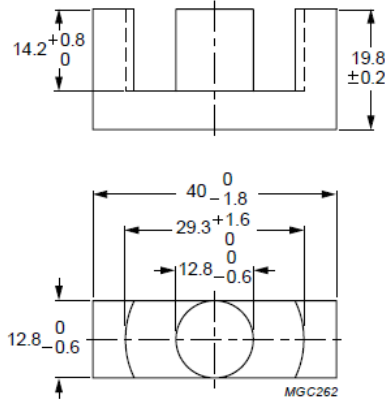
The dimension ETD 39-3C90 core half [145].
